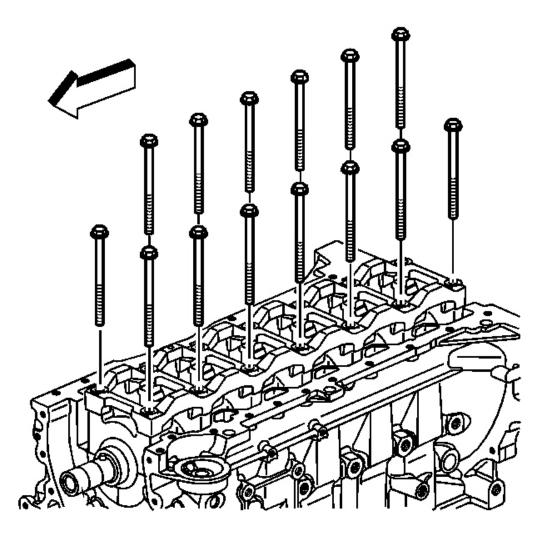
View Of Crankshaft Main Bearing Cap Bolts Courtesy of GENERAL MOTORS CORP.
